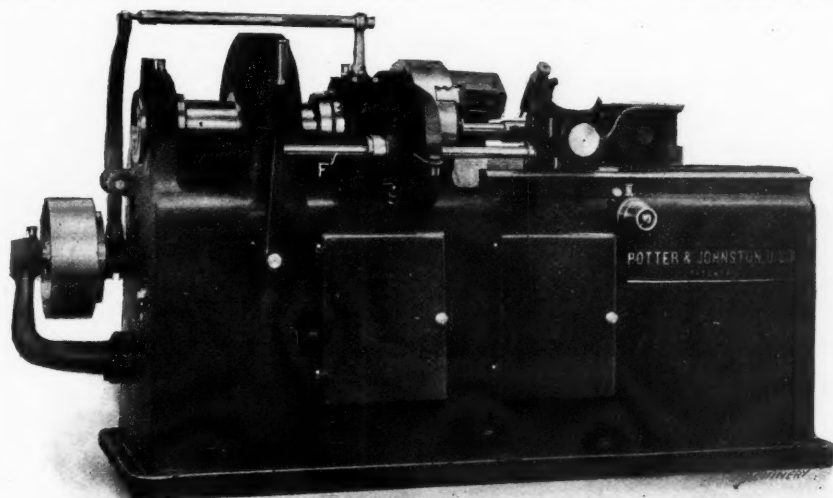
Potter & Johnston Automatic Piston and Piston-ring Machine
